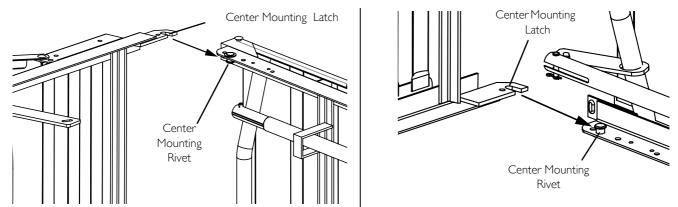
Set-Up - Assembling the Head and Foot Sections
